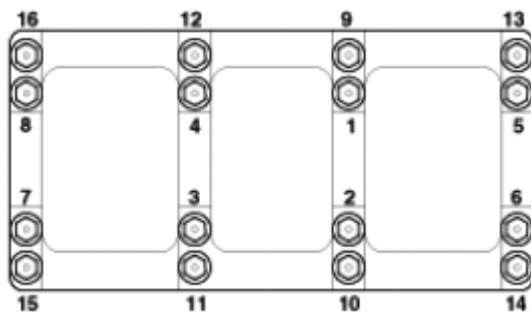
Identifying Bearing Cap Bolts Tightening Sequence
